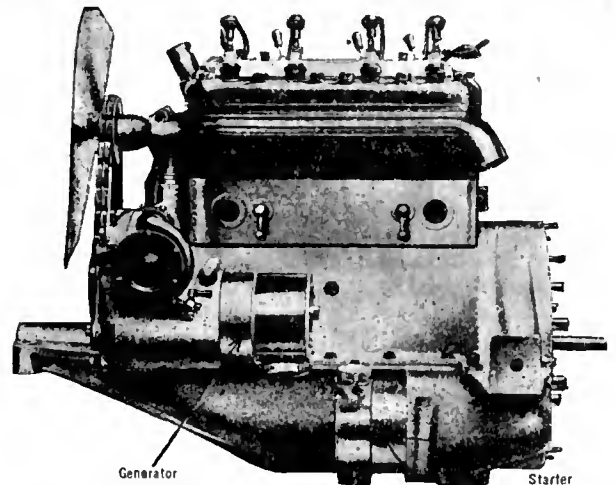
Fiat (Italian) engine, showing method of mounting electric generator and starter.
